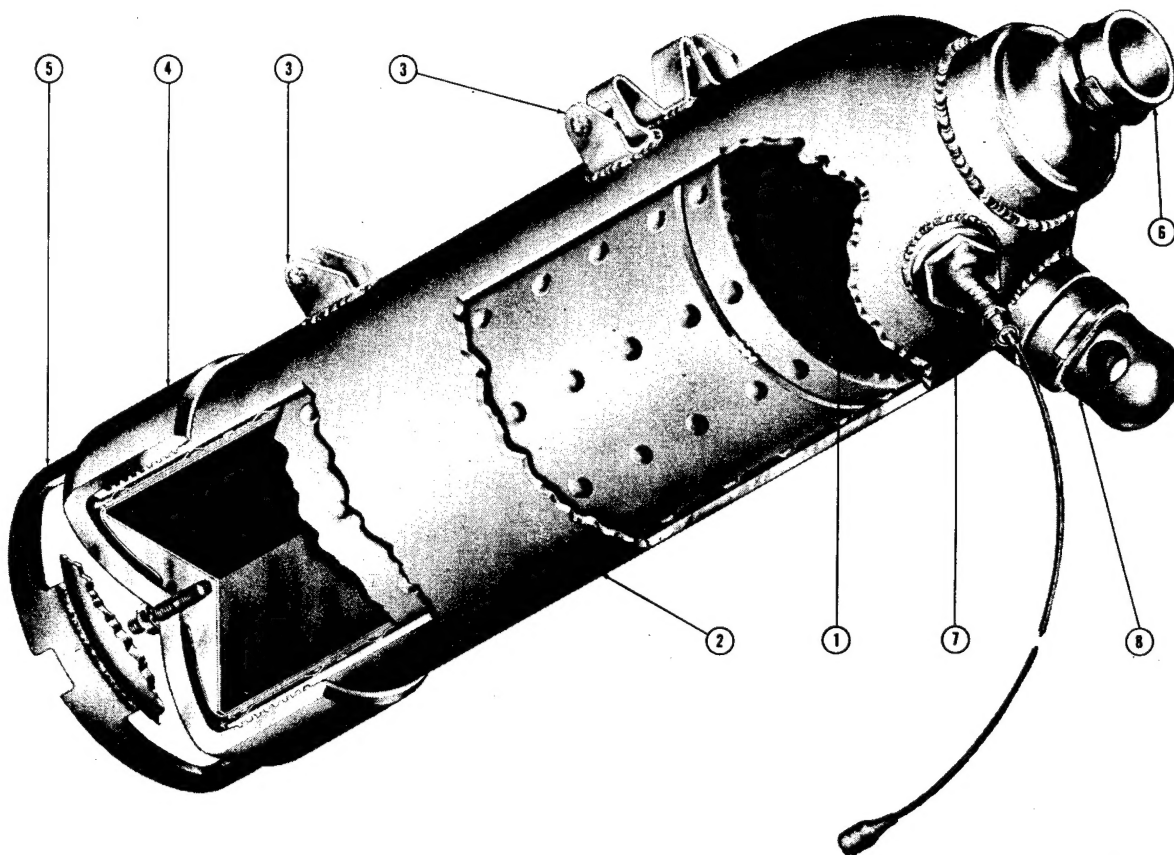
JATO construction. 1, propellant cartridge. 2, chamber assembly. 3, attachment fittings. 4, forward closure cap. 5, ring-stand. 6, nozzle assembly. 7, igniter assembly. 8, safety pressure release assembly.
